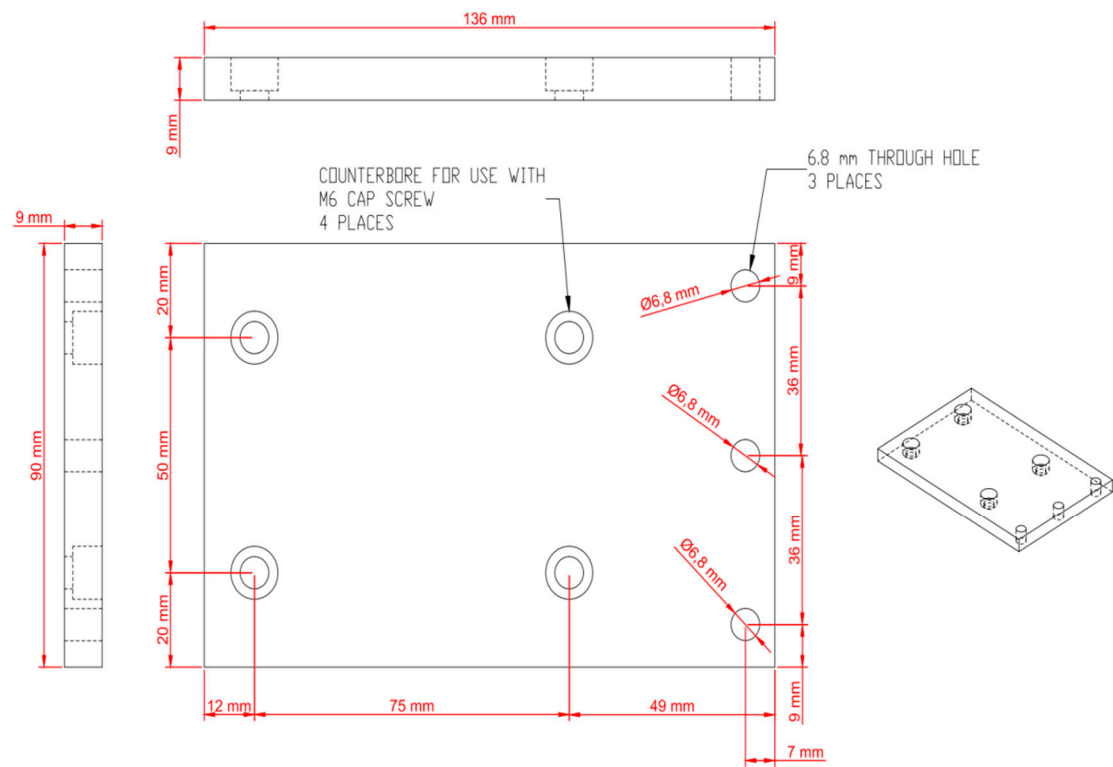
Detailed mechanical drawing of Part 11 from Figure S1.
